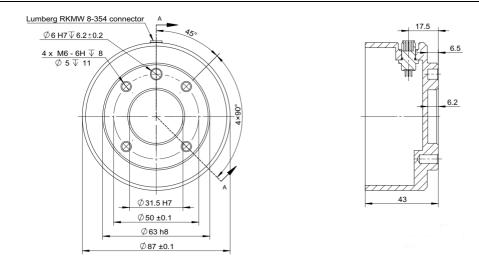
Mounting dimension drawing of the CS612 robot tool flange, with unit of mm
